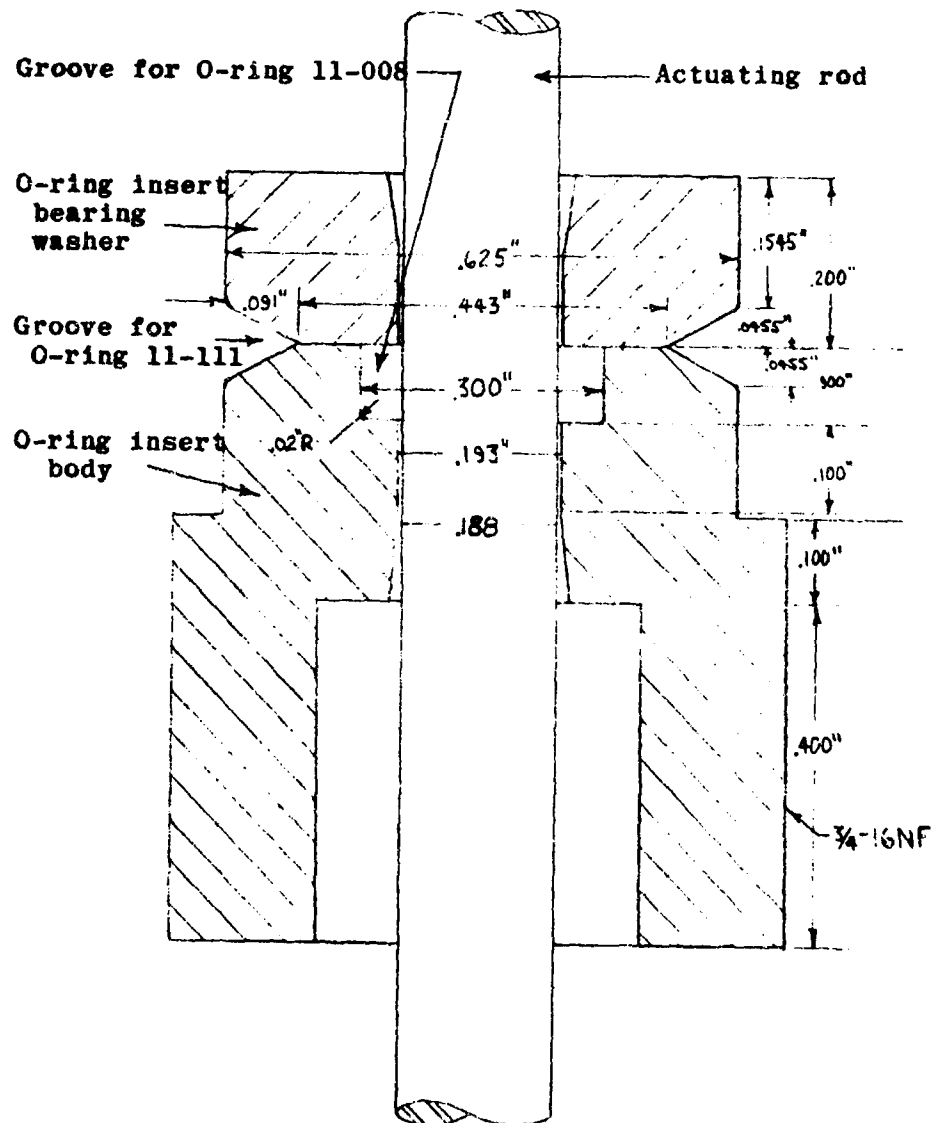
WORKING DRAWING OF SEAL FOR ACTUATING ROD
